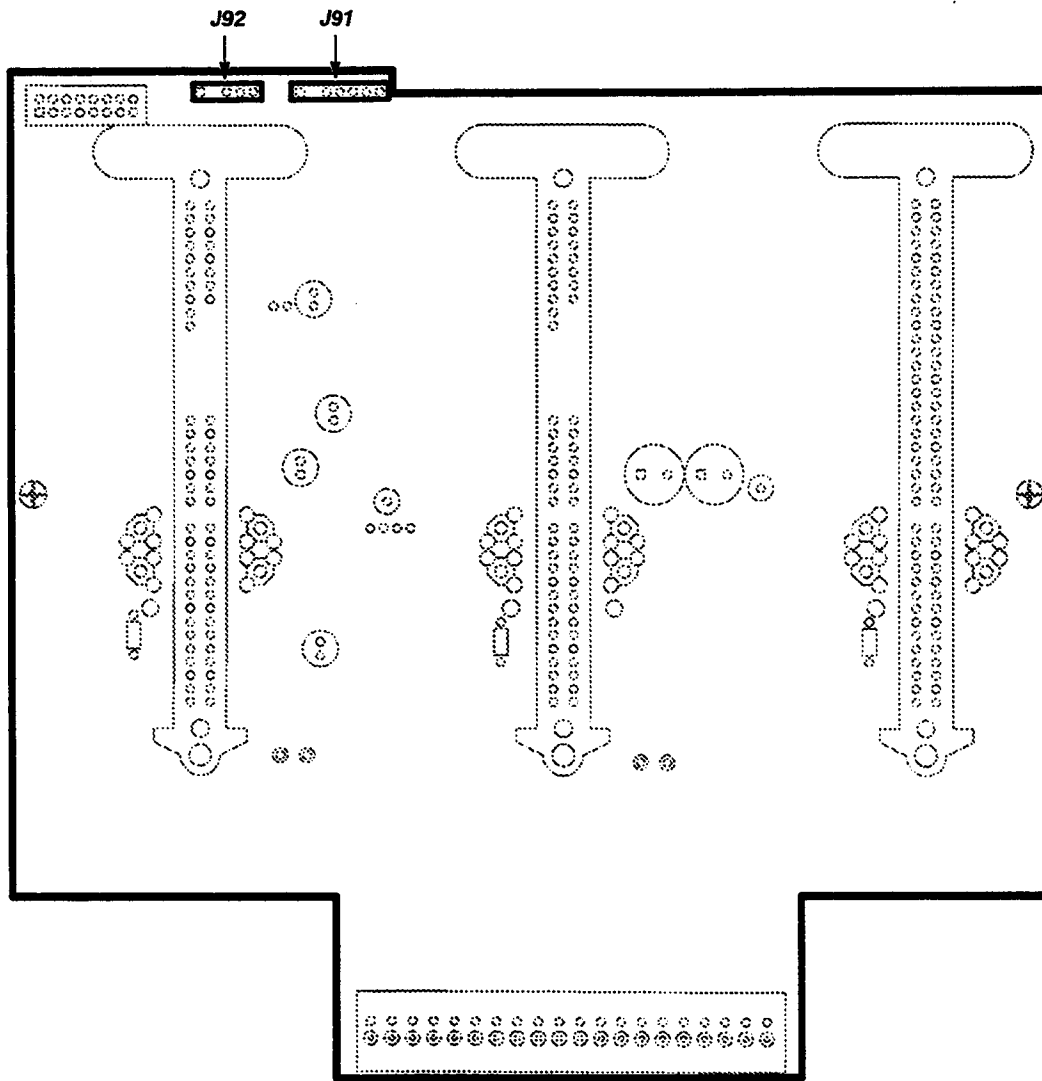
Removing/Replacing the A1 Plug-in Interface Board
